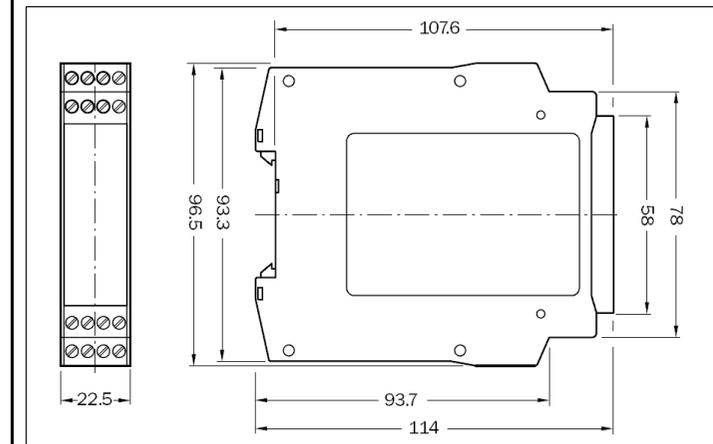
Dimensional drawing UE10-30S with removable terminals (mm)
